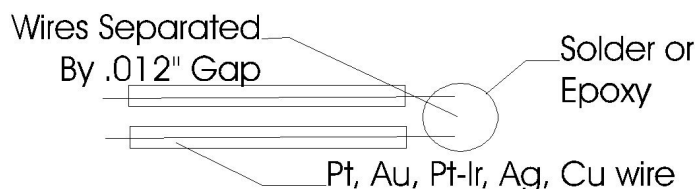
Solder tester. Wires are joined by solder alone, wires do not touch within blob of solder.
